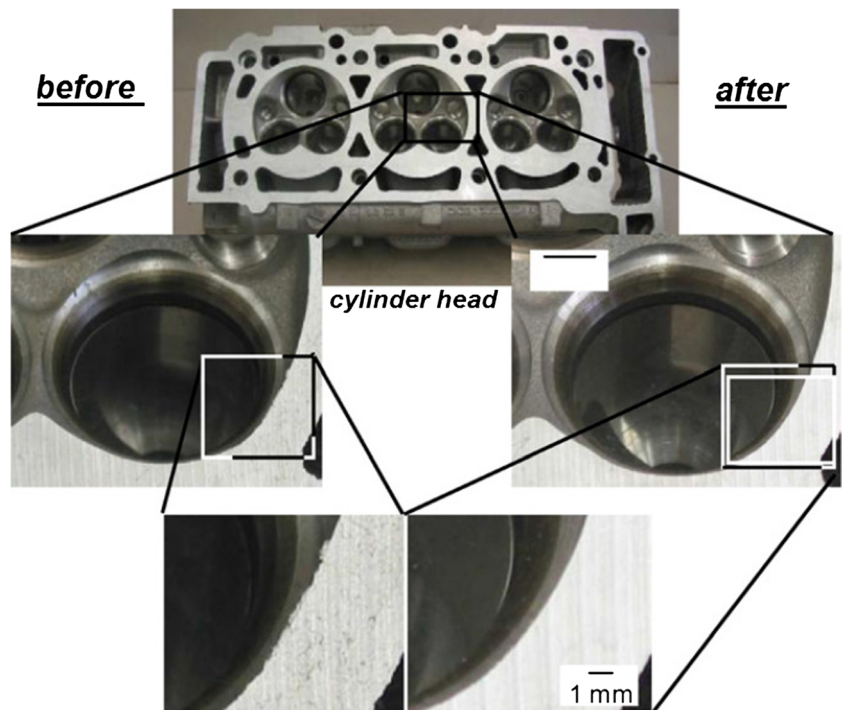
Brush deburring of the aluminum cylinder head using various brushing tools (Adapted from [108])
